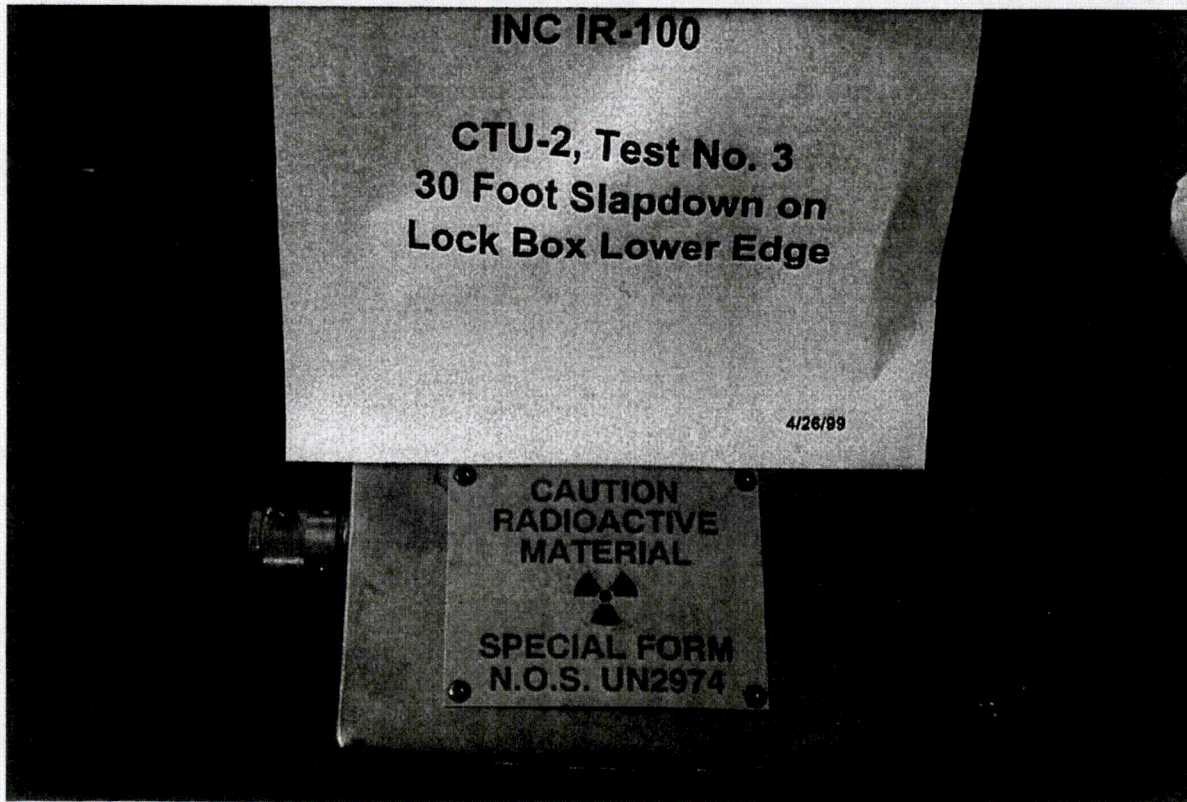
CTU-2 Free Drop Test No. 3; Failed Seam Weld on Housing
